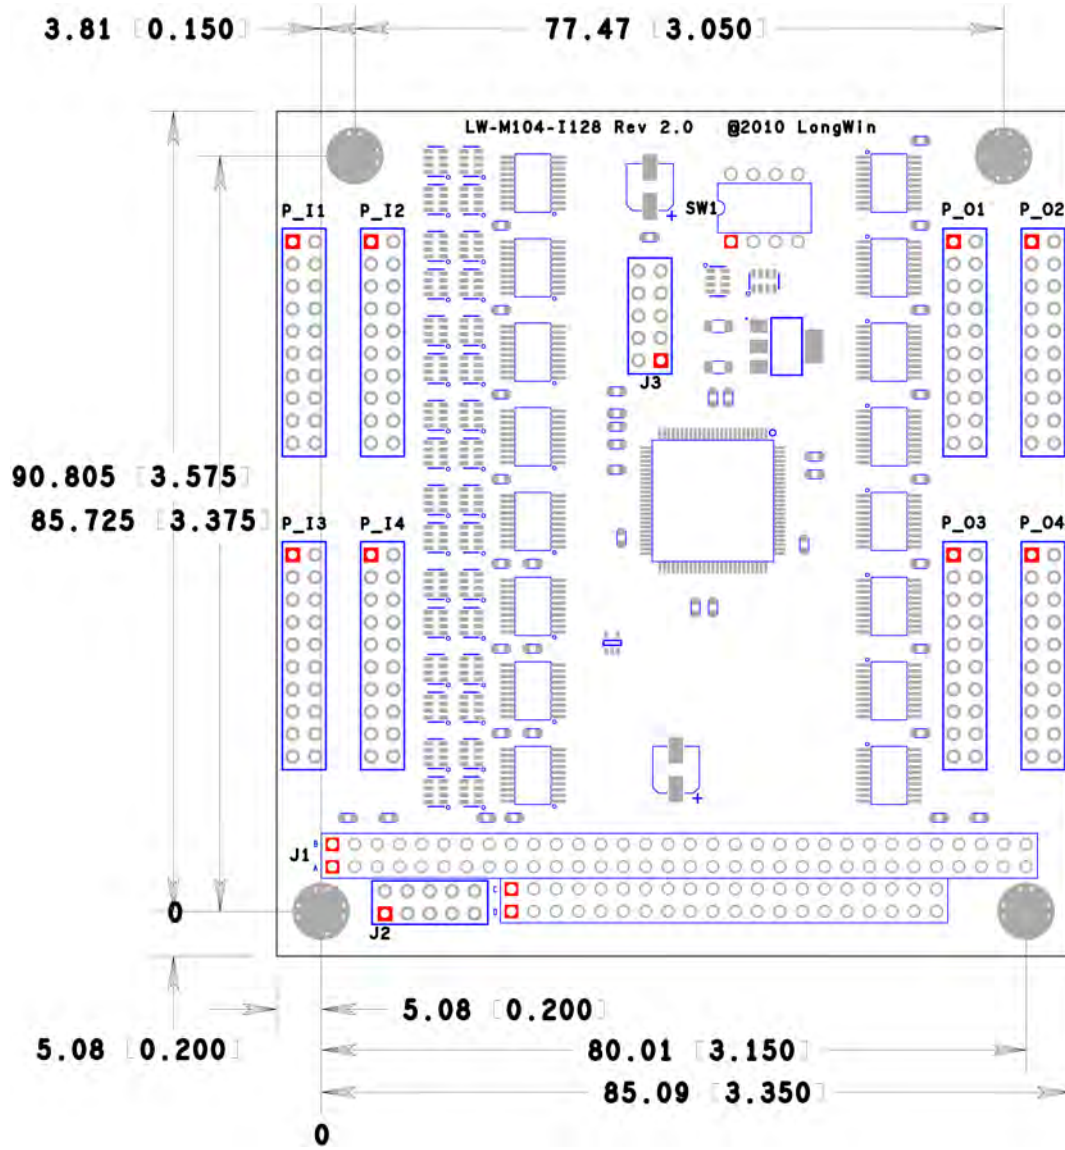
LW-M104-I128 R2 (DX) Board Dimension (Millimeter)
